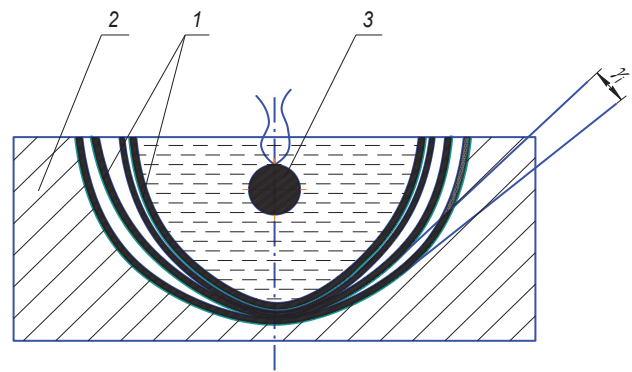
Scheme of multilayered wall compaction: 1 - blank stack; 2 - die; 3 - explosive charge
